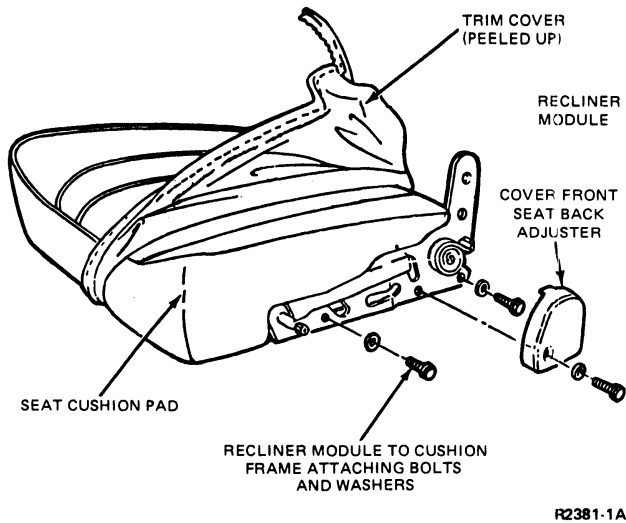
Recliner Module Removal and Replacement—Captain's Chairs—F-100—F-350 Super Cab and Bronco
